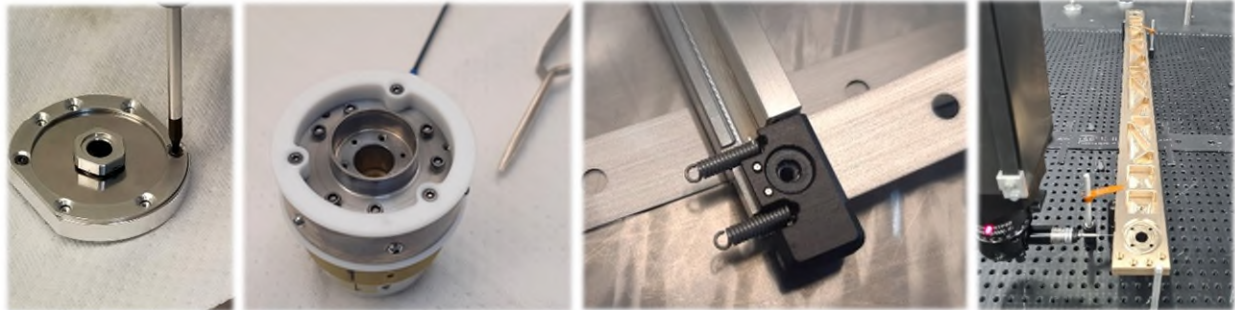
Breadboard Component Photos: Diaphragm spring pack (left), sprocket wheel/flex assembly (center left), spreader bar slider (center right), sidewall structure in final inspection (right)
